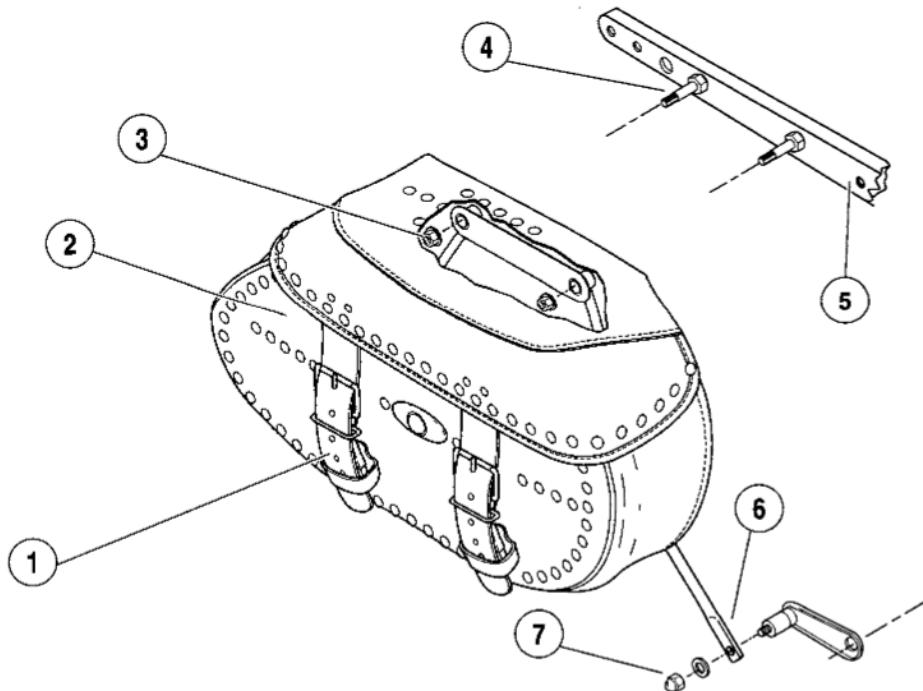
FLSTC / FLSTS Saddlebag Assembly (FLSTC shown)
